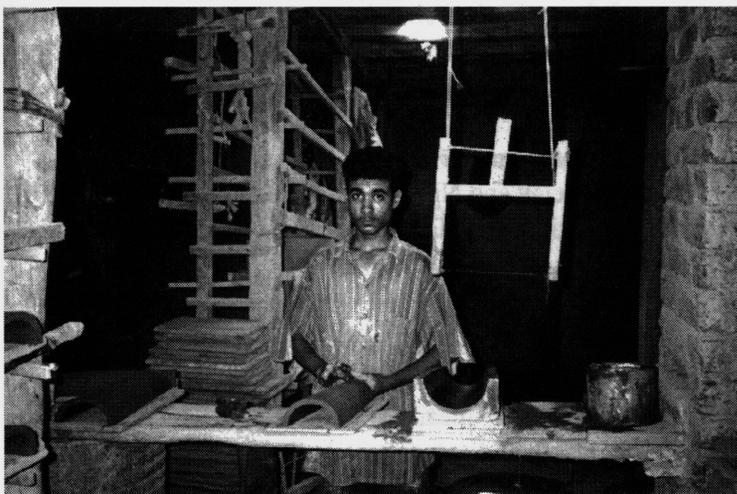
A skilled worker putting finishing touches on a molded roof tile (*aramīt*) at the Old Cairo workshop; note the mold at his left elbow. The hanging wooden frame just above the mold has a cord stretched across its lower part; this is used to trim the edges of the roof tile when it is still in the mold.
